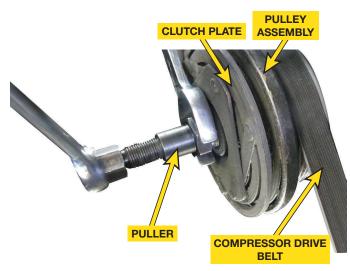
After removing the retaining nut from the A/C compressor shaft, a special puller is used to remove the compressor clutch plate (hub).
